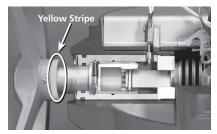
Handwheel is engaged, revealing the yellow stripe.
